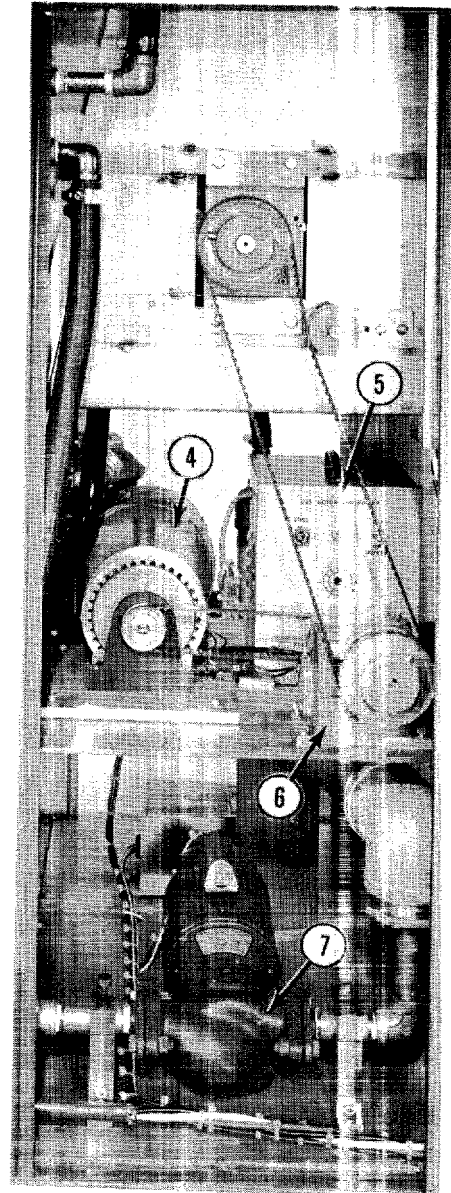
Auxiliary Drum Dryer Drive and Pump Assemblies
